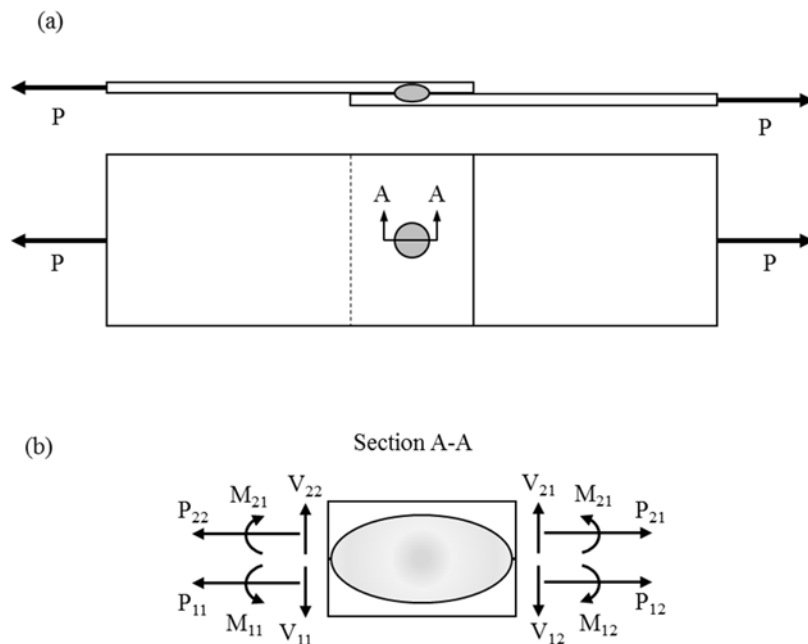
Nomenclature for weld geometry and local loads. (a) Layout of spot weld specimen, (b) section through spot weld showing edge reactions [1-16].
